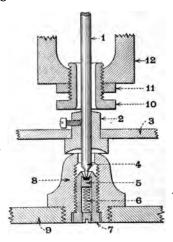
Arrangement of Clamping Gear and Lower Bearing of Thomson Meter.
